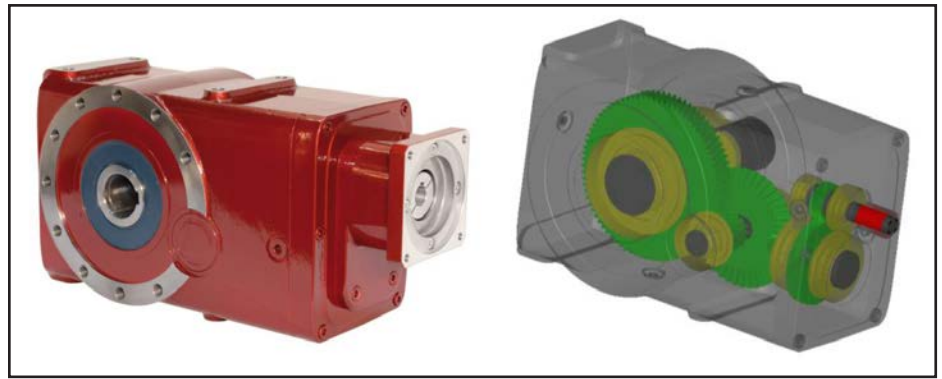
ZAE cylindrical bevel gearbox and KISSsoft model.
